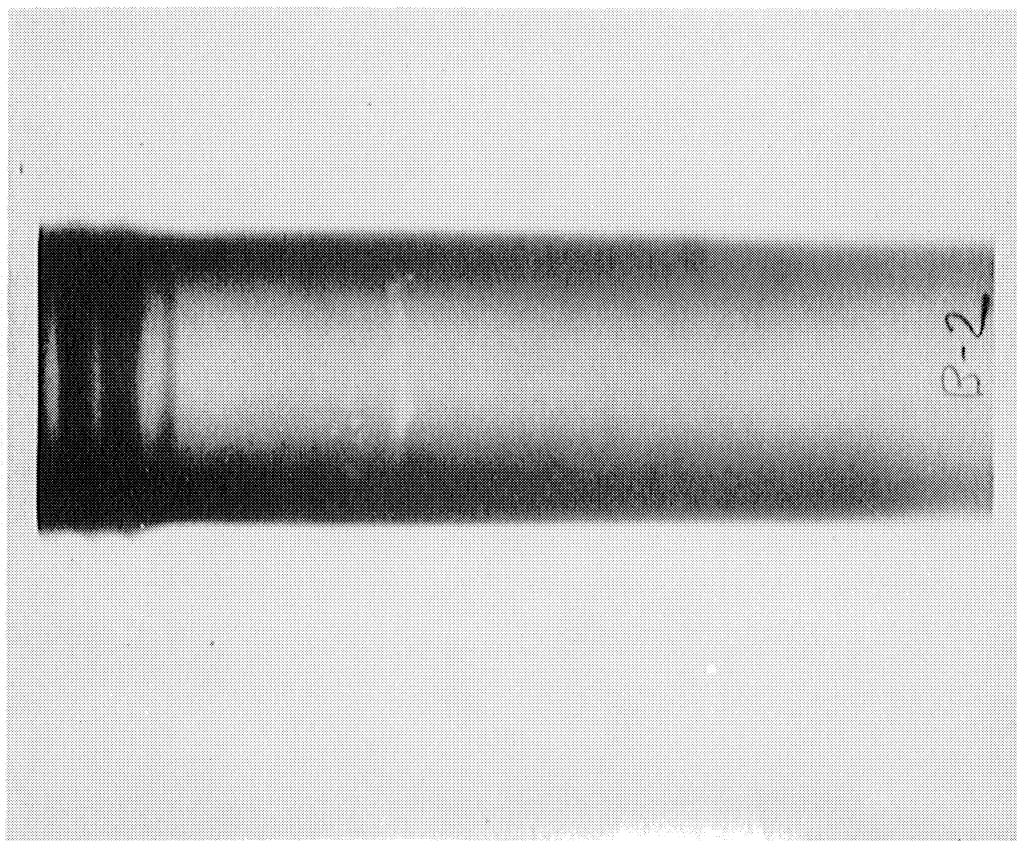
X-ray B-2: Weld in Upper Body -
